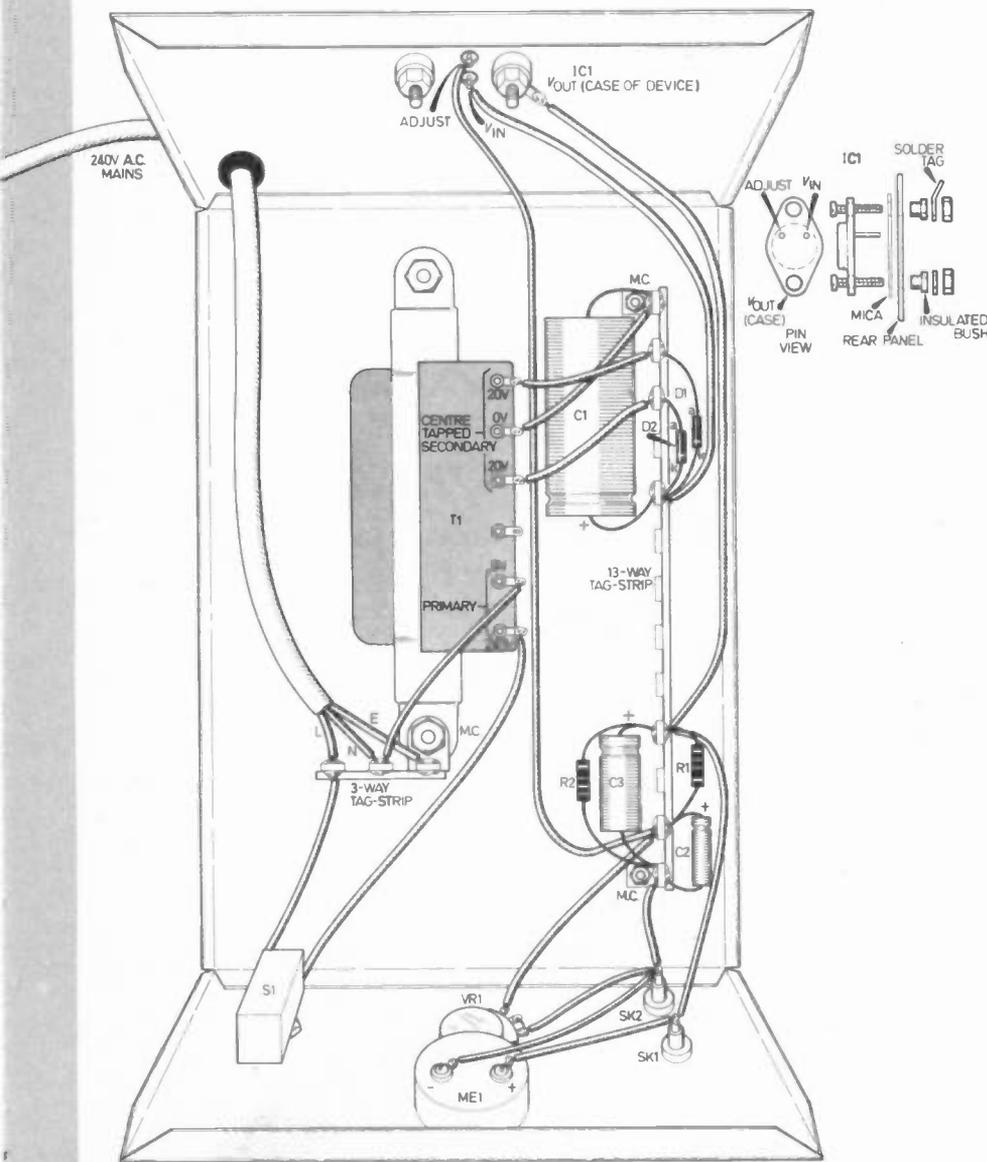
Recommended layout of the components on the Universal Chassis members with full interwiring details. Also shown top right are the mounting details for IC1 and its insulation set.
